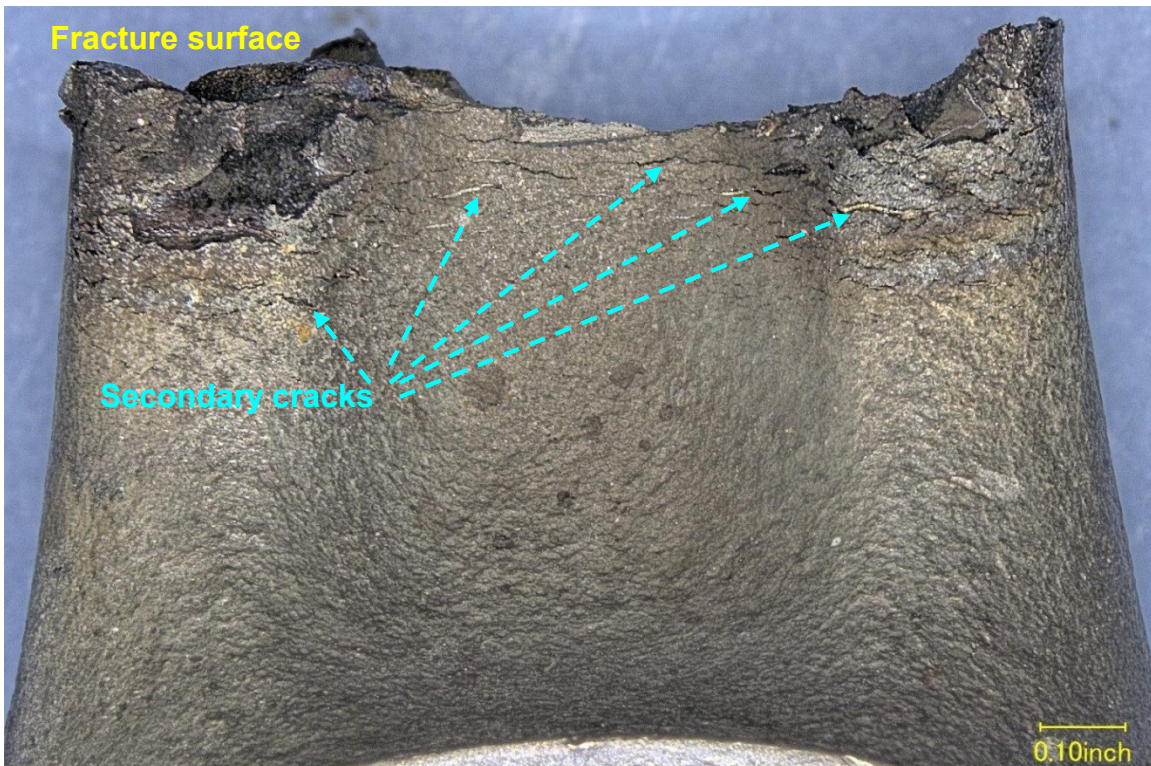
The #2 connecting rod shaft near the fracture surface, from the side, showing secondary cracks below the fracture surface.
